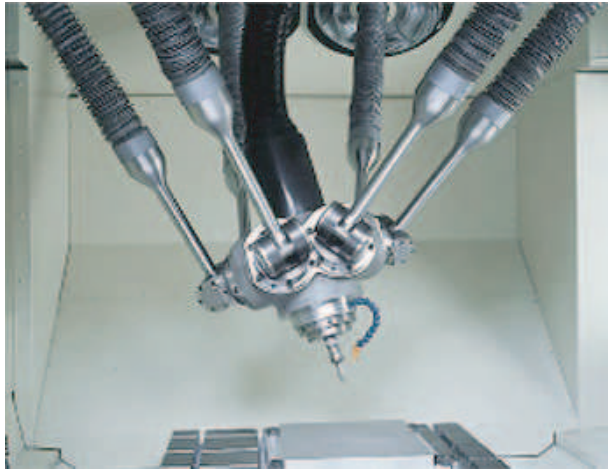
5-axis milling machine (OKUMA Cosmo Center PM-600)
